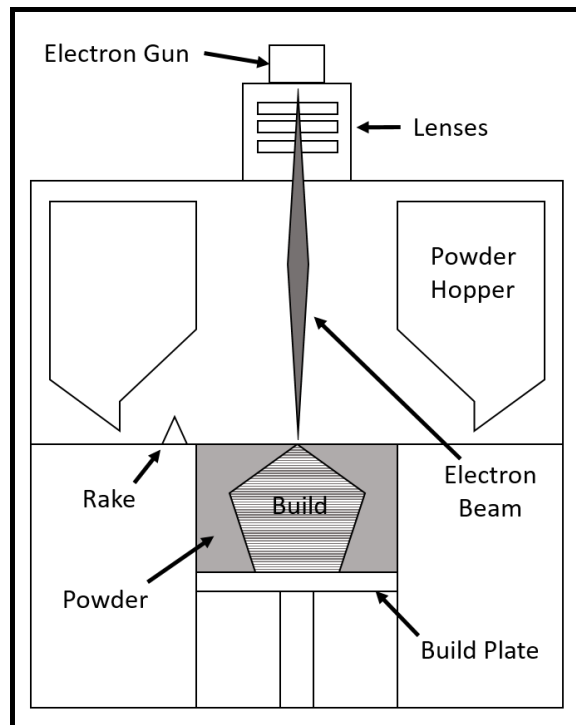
Schematic of a typical Electron Beam Melting Machine.
